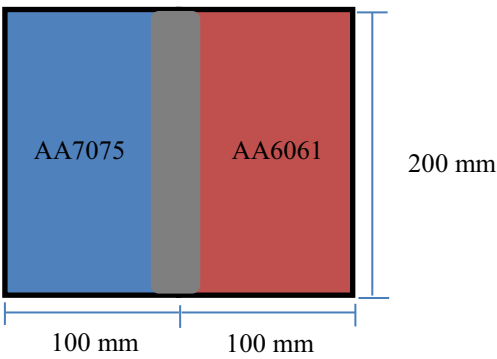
Two plates with dissimilar material welded by FSW.
